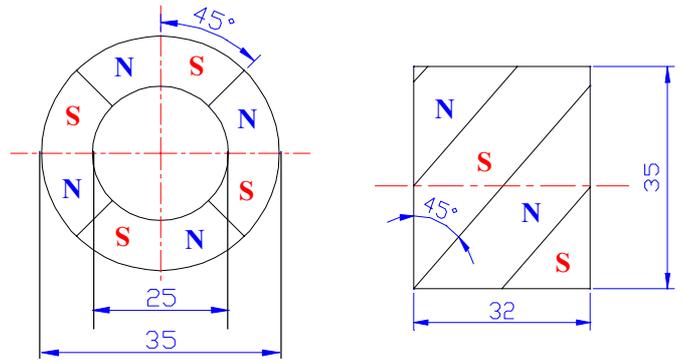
Configuration and dimension of final model (Left: front view, Right: side view)
